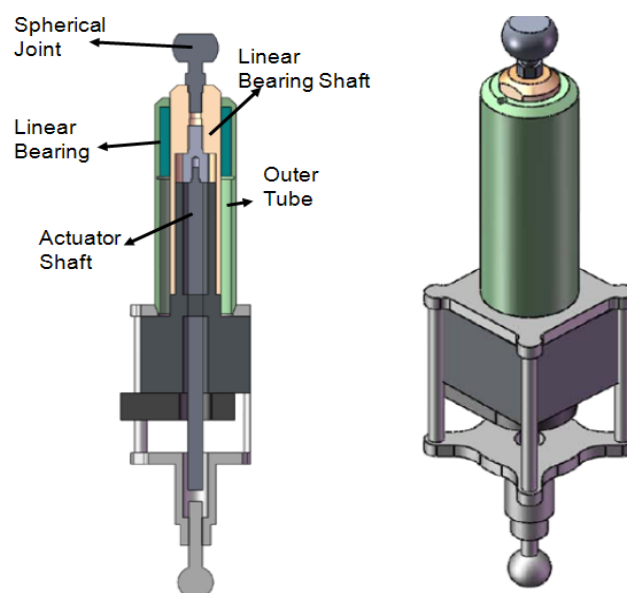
Isometric view and section of 'lsa' and 'lsb' sub-assemblies.
